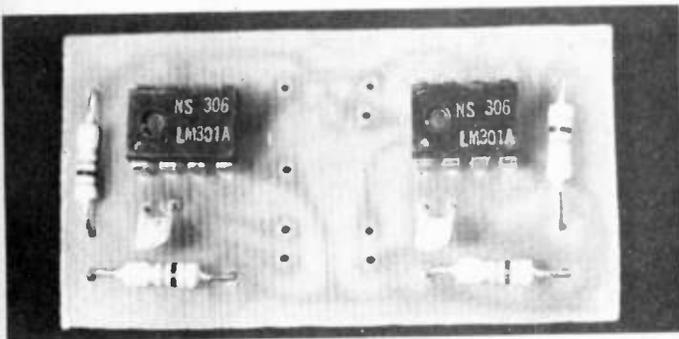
The completed PC board is connected by means of wire links from the remaining holes to the LM381 socket on the preamplifier board.
